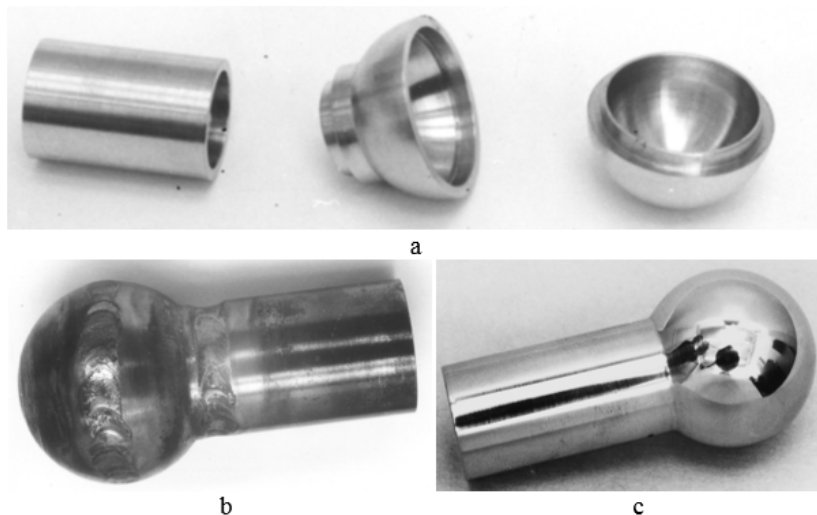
Composite head and stem before welding (a), appearance of endoprosthesis after welding (b) and appearance of endoprosthesis after final machining (c)
